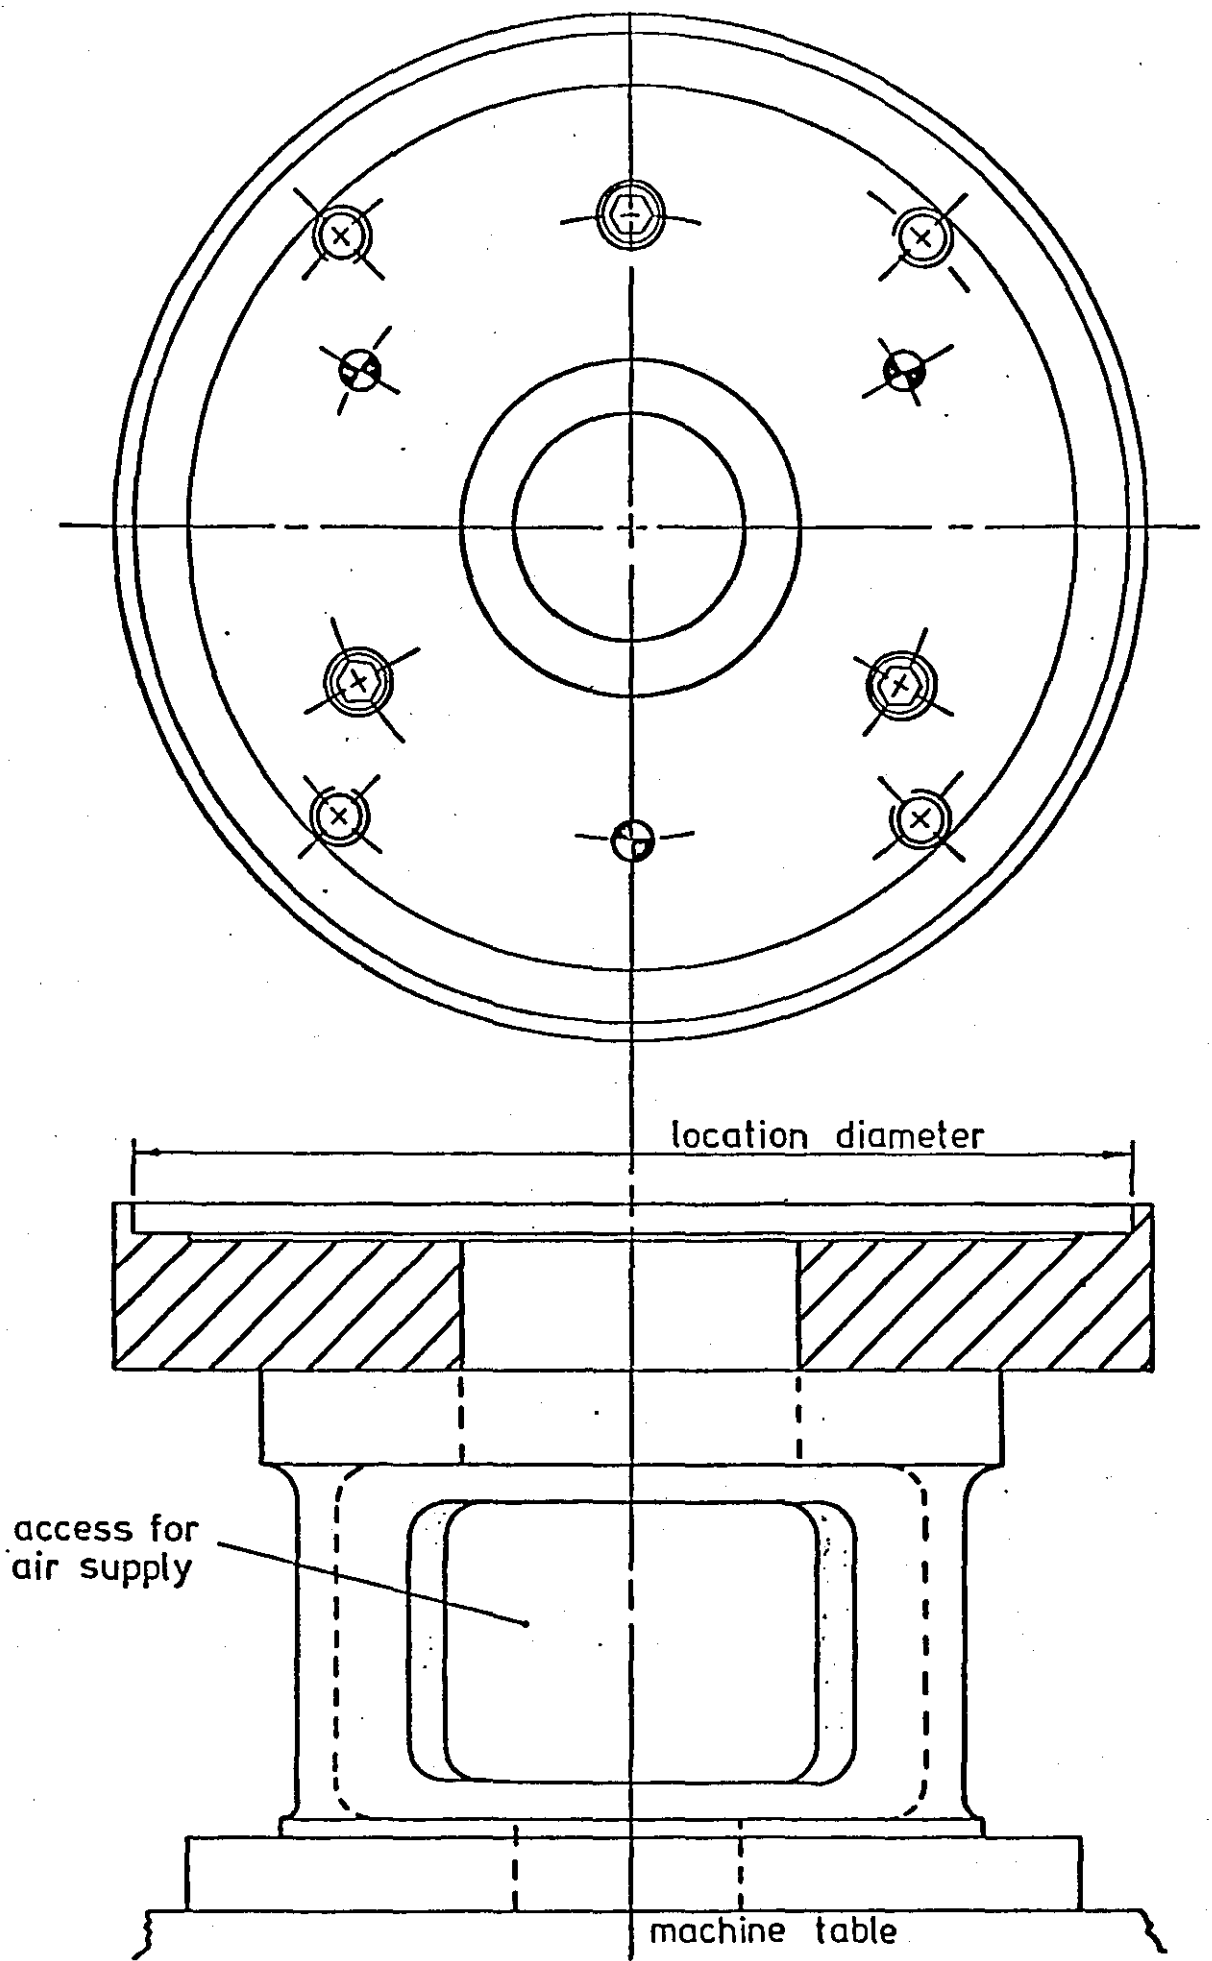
FIXTURE FOR LOCATING DIAPHRAGM CHUCK
